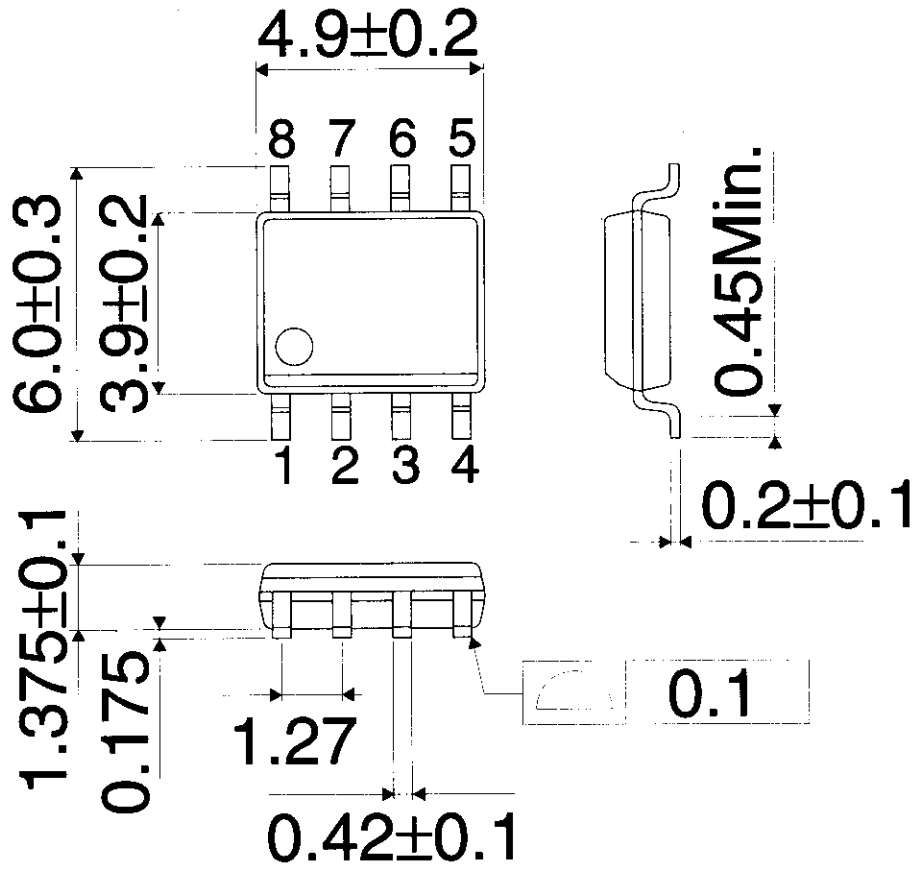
Outline Dimensions SOP-J8(BR93L66FJ-W)
